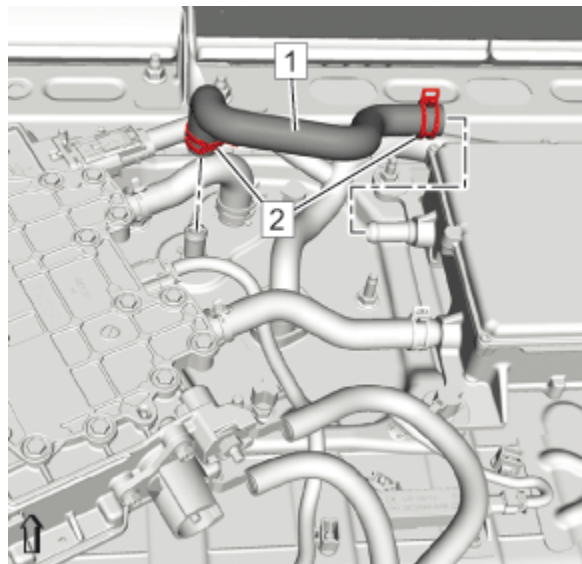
Clamp And Generator Control Module Coolant Tank Hose
